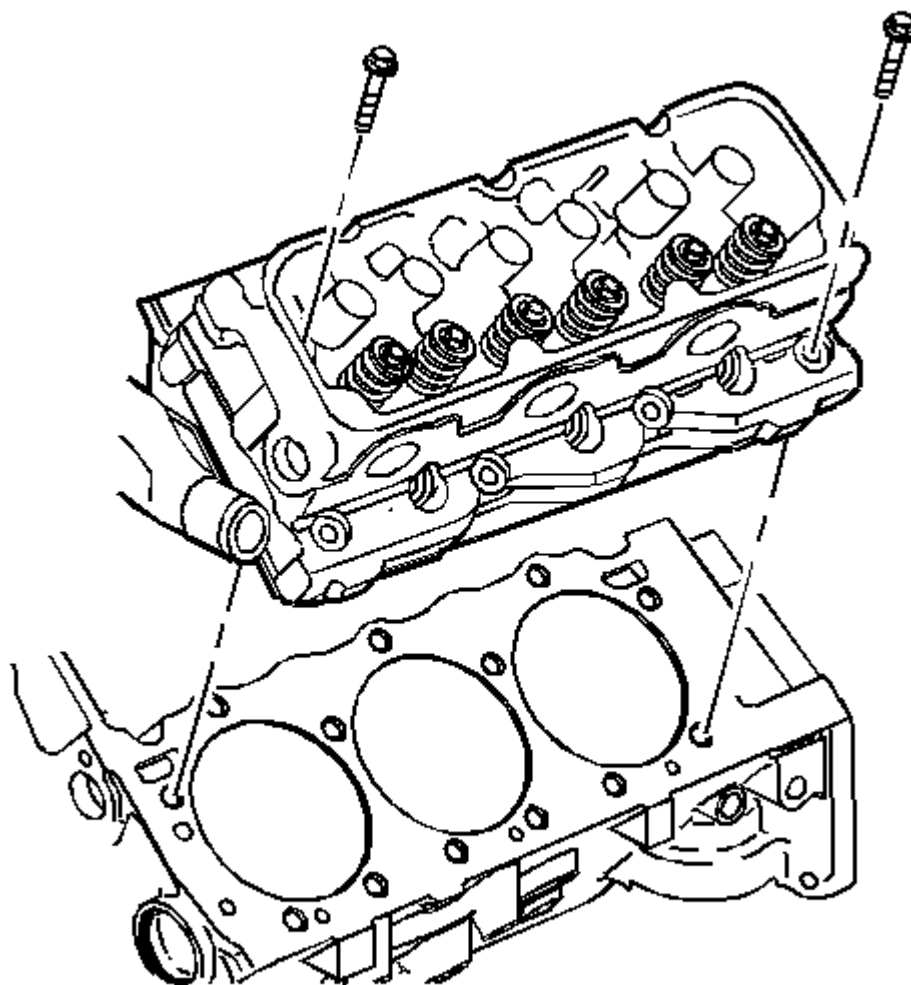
Identifying Cylinder Head & Cylinder Head Bolts
